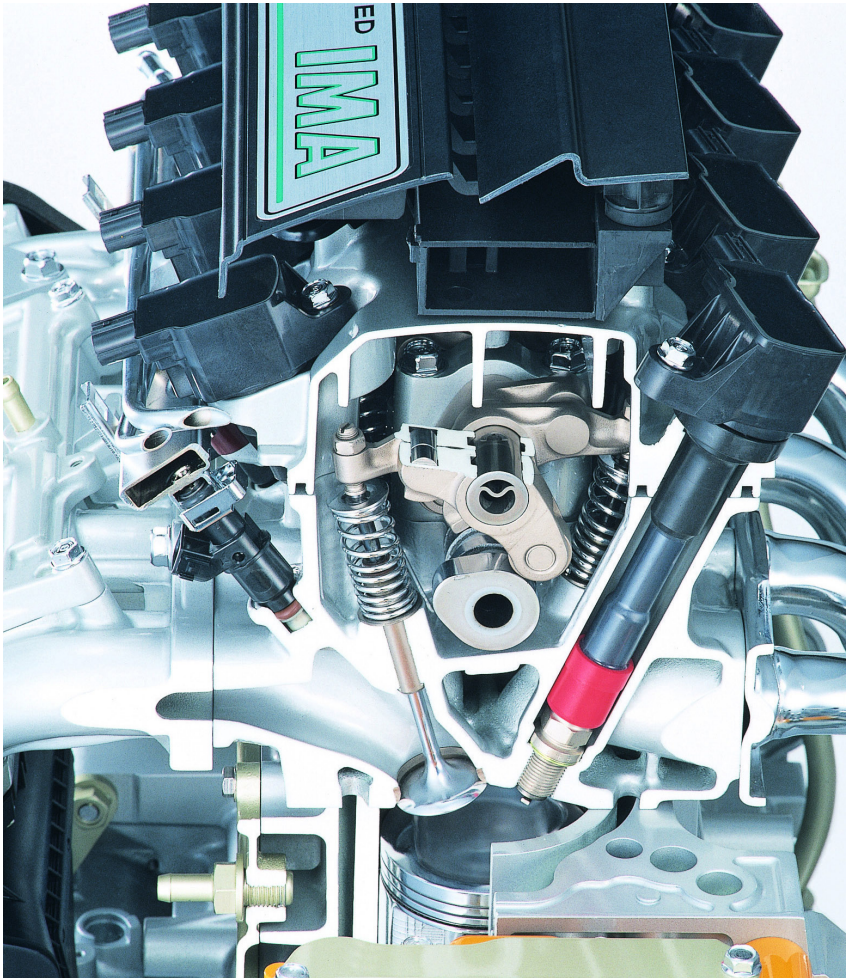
Latest valve mechanism showing auxiliary combustion chamber
